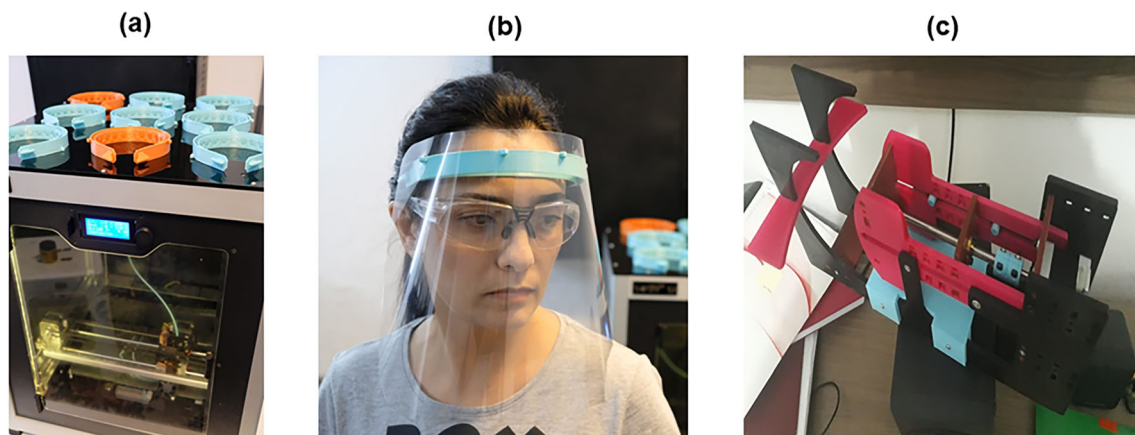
OSH designs produced by the COVID-19 NÃO São João Del-Rei group of makers: 3D-printed supports for face shields and printer (a), complete face shield assembled with acetate foil being worn (b), first
